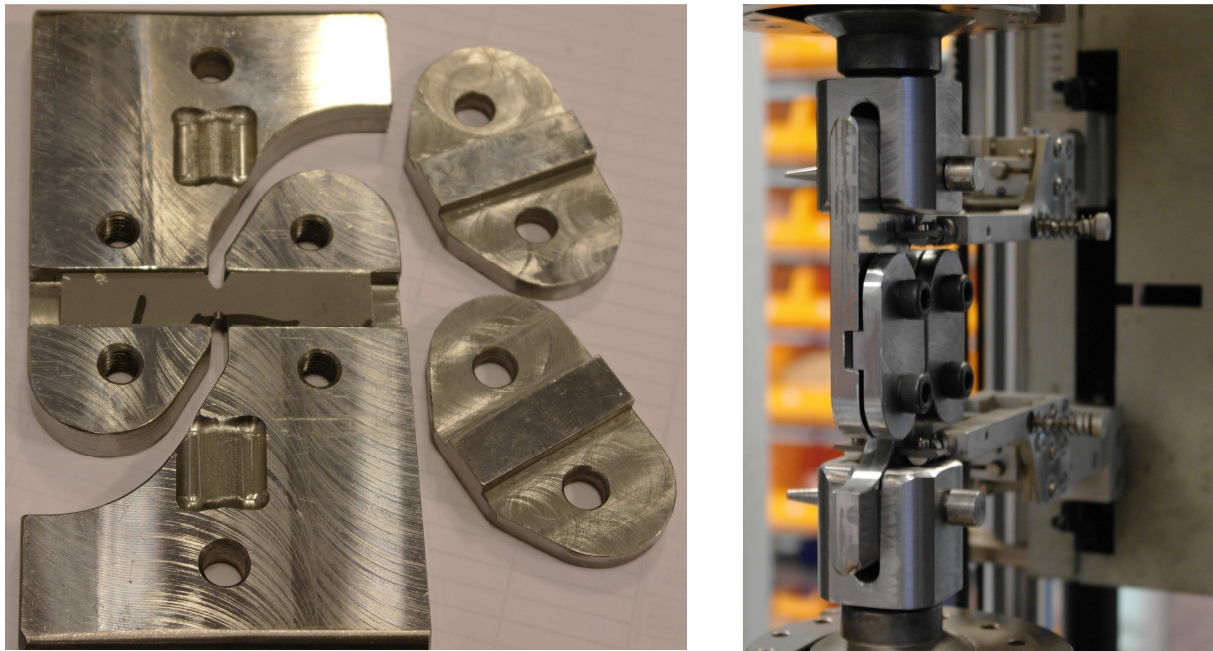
Test specimen, holder and fixation brackets as well as test arrangement with extensometers
